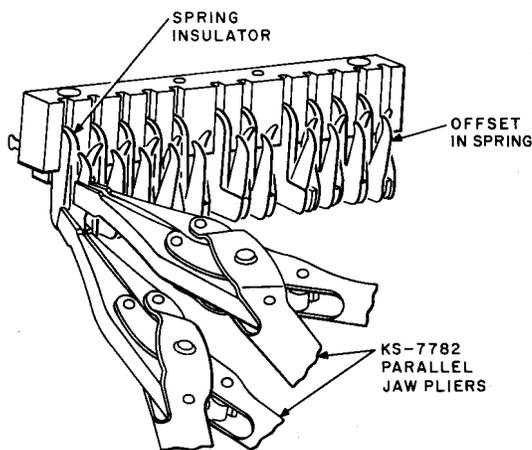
Method of Adjusting Springs to Make Contact With the Switch Removed From the Shelf
